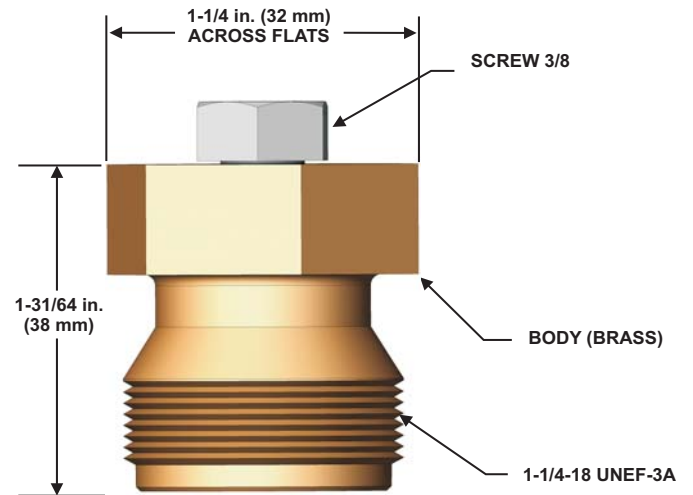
Reset Tool Assembly, P/N 81-129958-001
